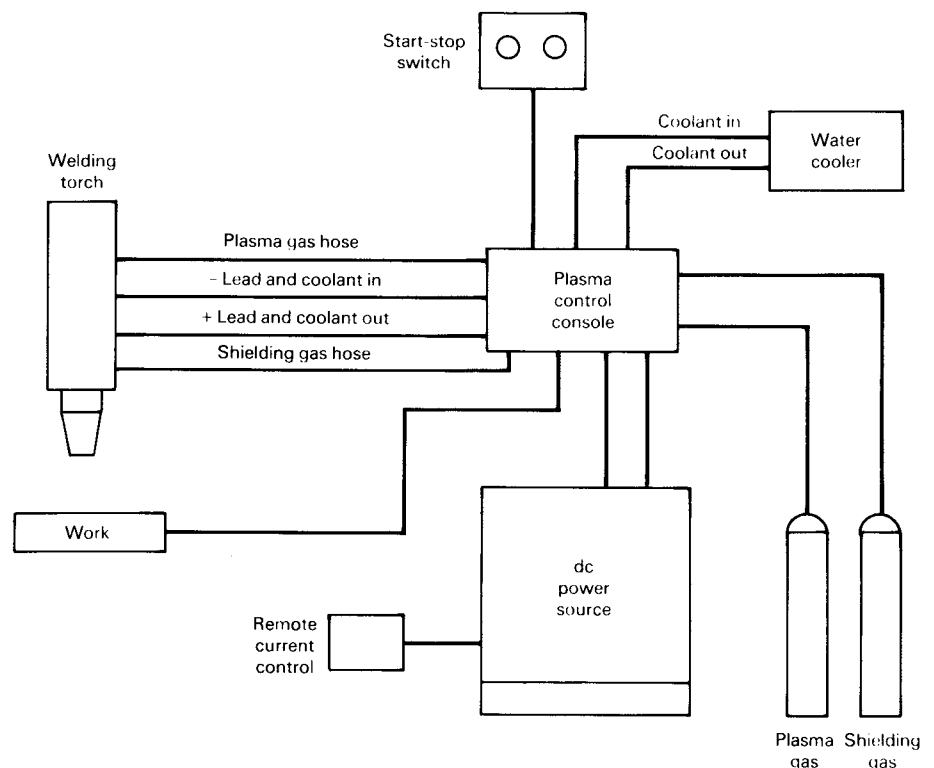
Typical equipment for plasma arc welding. dc, direct current
